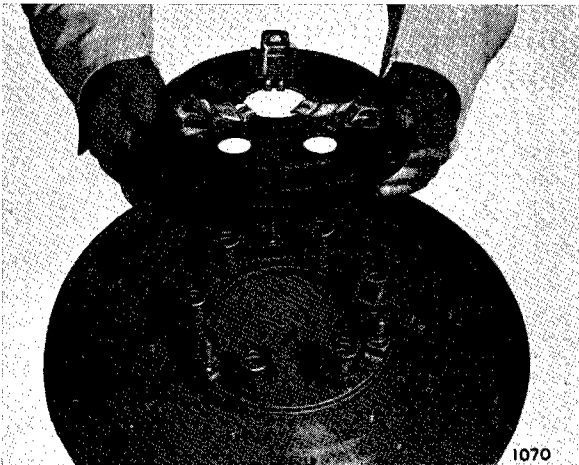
Removing clutch cover assembly (Herald and Spitfire)
